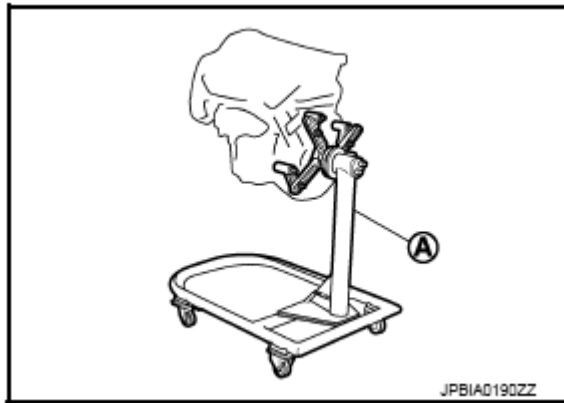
Holding Mating Surface Of Transmission With Drive Plate Using Engine Stand
